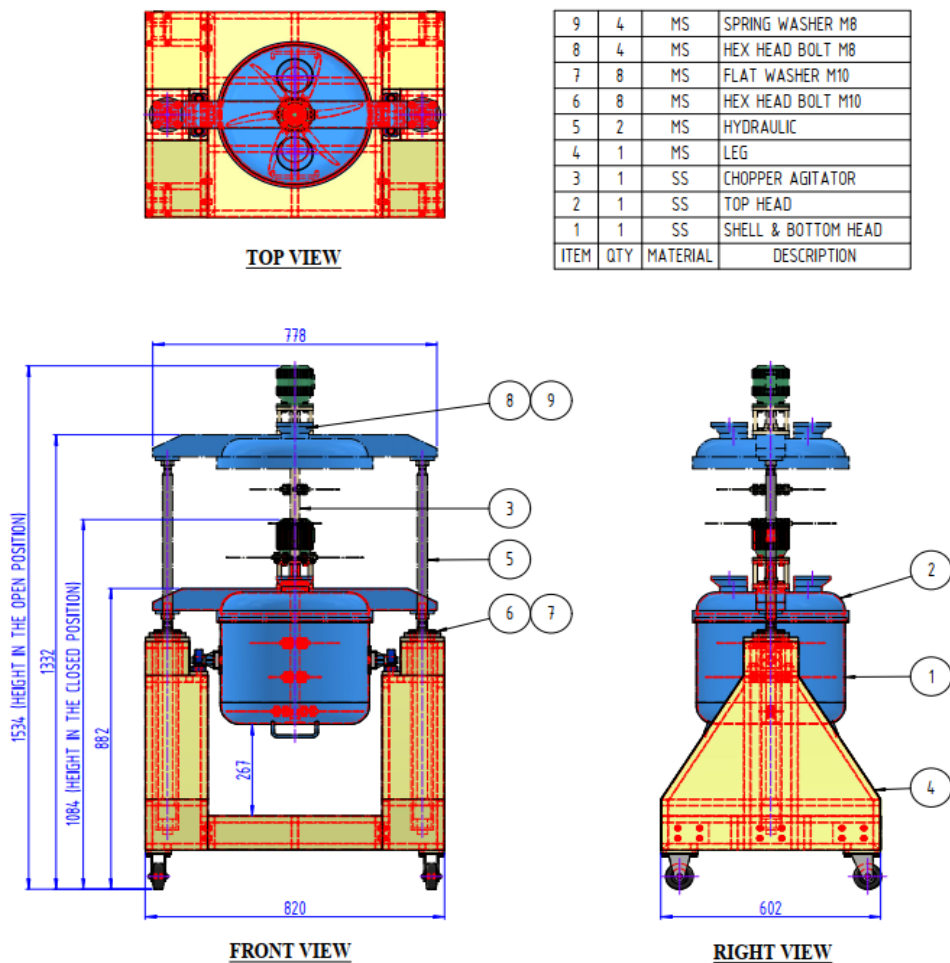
Design dimensions of the organic waste chopper machine (All dimensions in mm)
